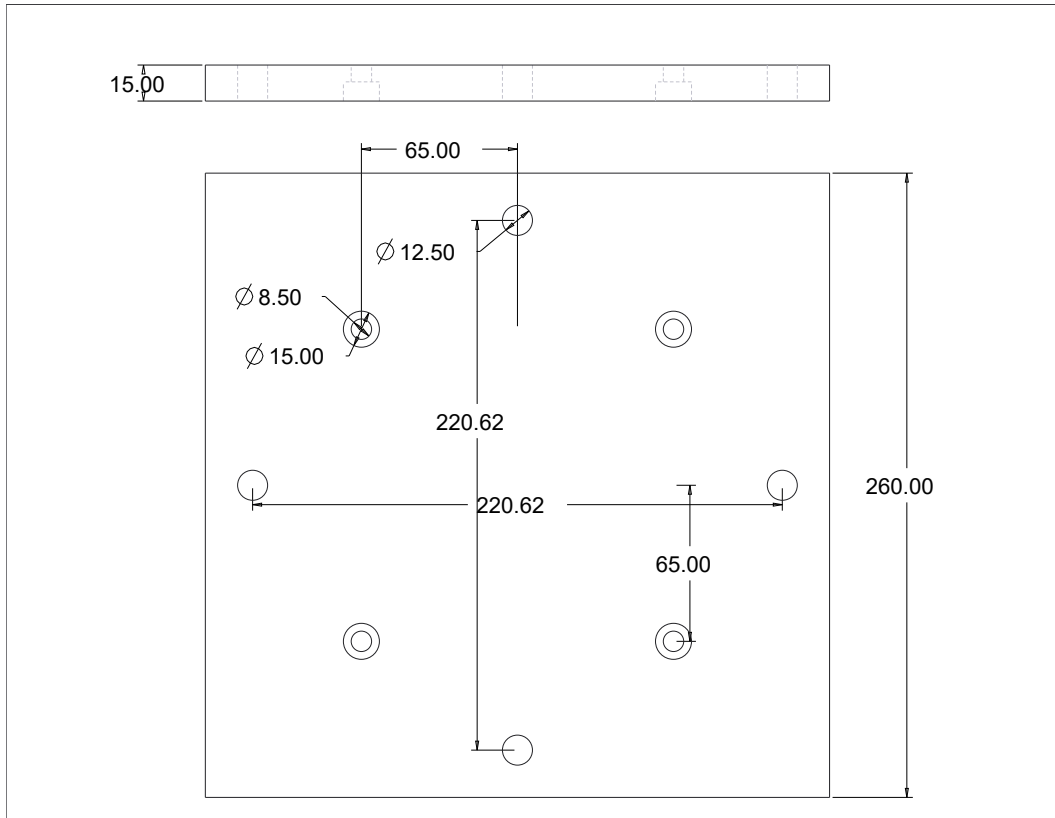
Top plate for fixing bend fixture in AMINO Press (dimensions are in mm)
